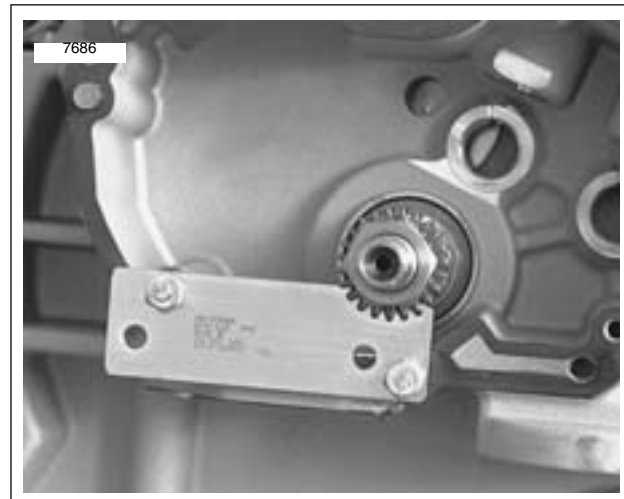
Crankshaft Locking Tool (HD-43984)
